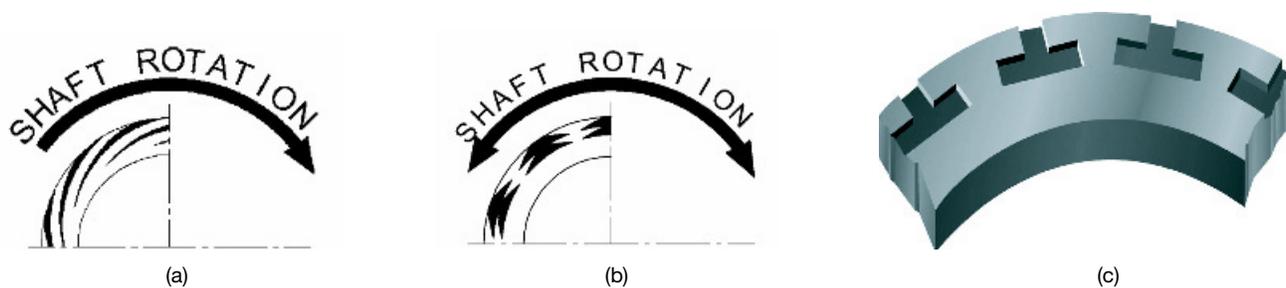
Dry gas seal face configurations: spiral groove (a), bidirectional groove (b), and T-groove (c).
